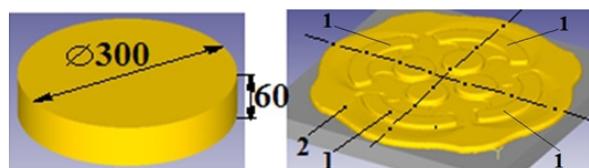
Multi-piece forging: a – workpiece for multi-forging, b – model of multi-forging; 1 – forgings; 2 – flash
